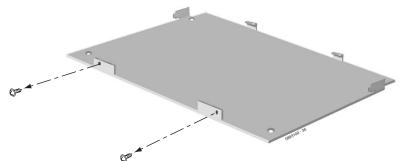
REMOVING THE SCREWS FROM THE BRACKET
